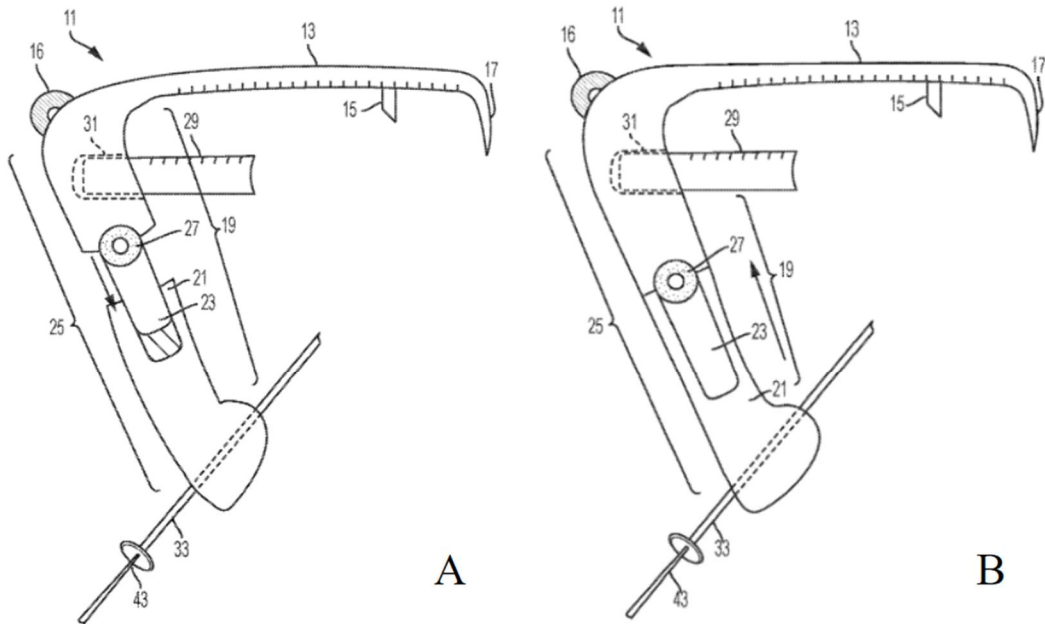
Technical drawing of patented tibial guide design. A and B demonstrates the hinge mechanics.
